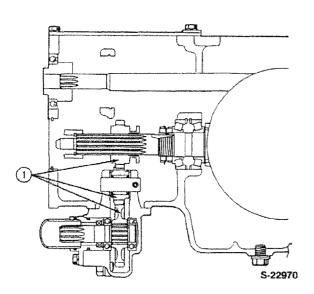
Front Wheel Drive Gears 1. FWD Gears
